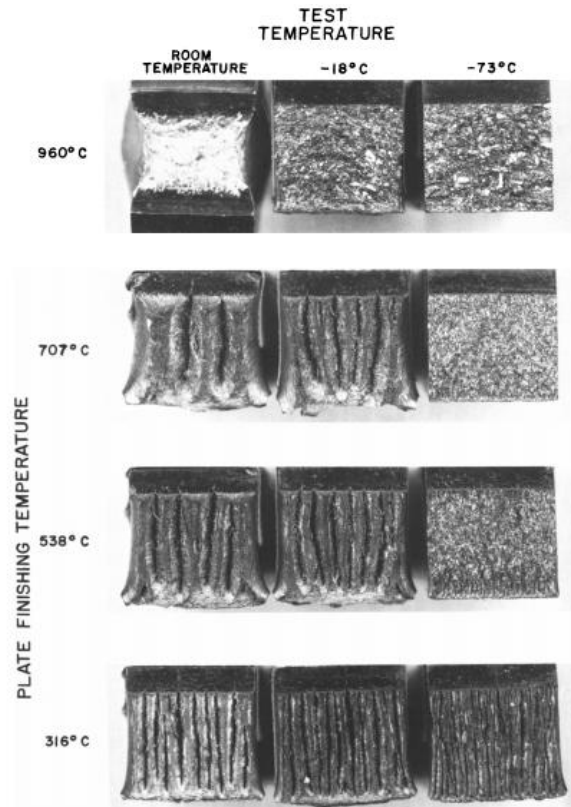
Charpy fracture surfaces for samples with different finish rolling temperatures (79).
